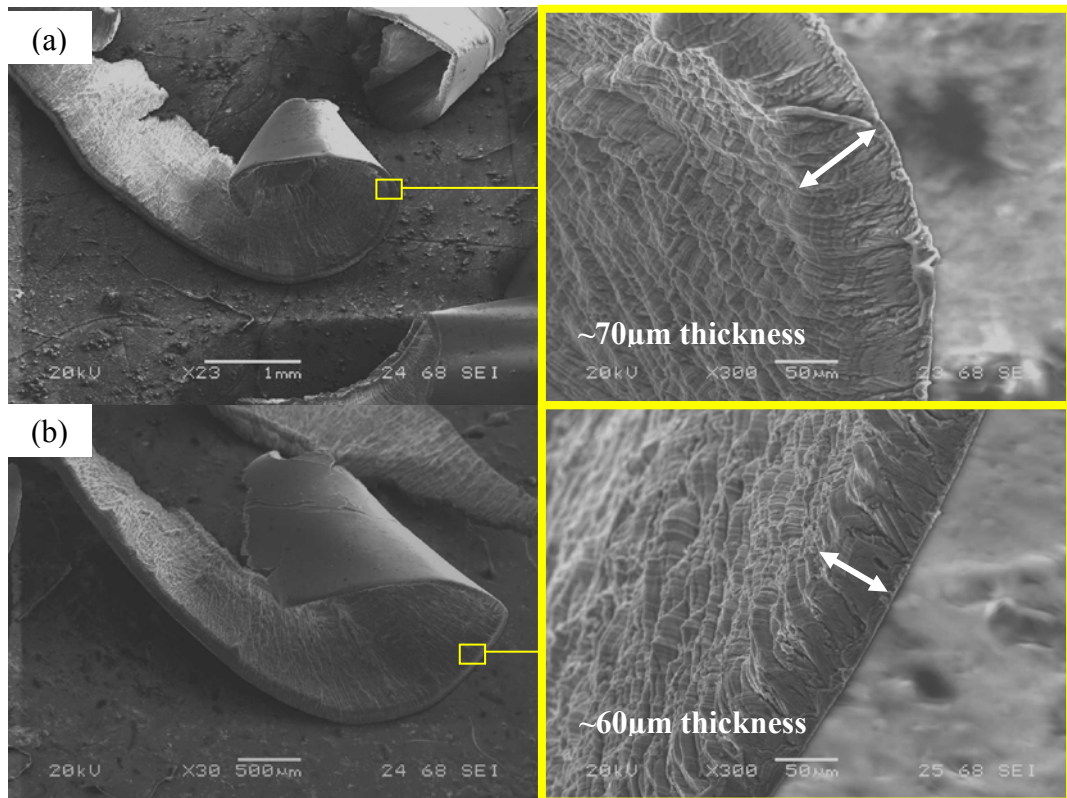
Chip formation produced by PCD CTM302 drills under different cutting speeds in (a) Test 7 (130m/min) and (b) Test 8 (260m/min)
